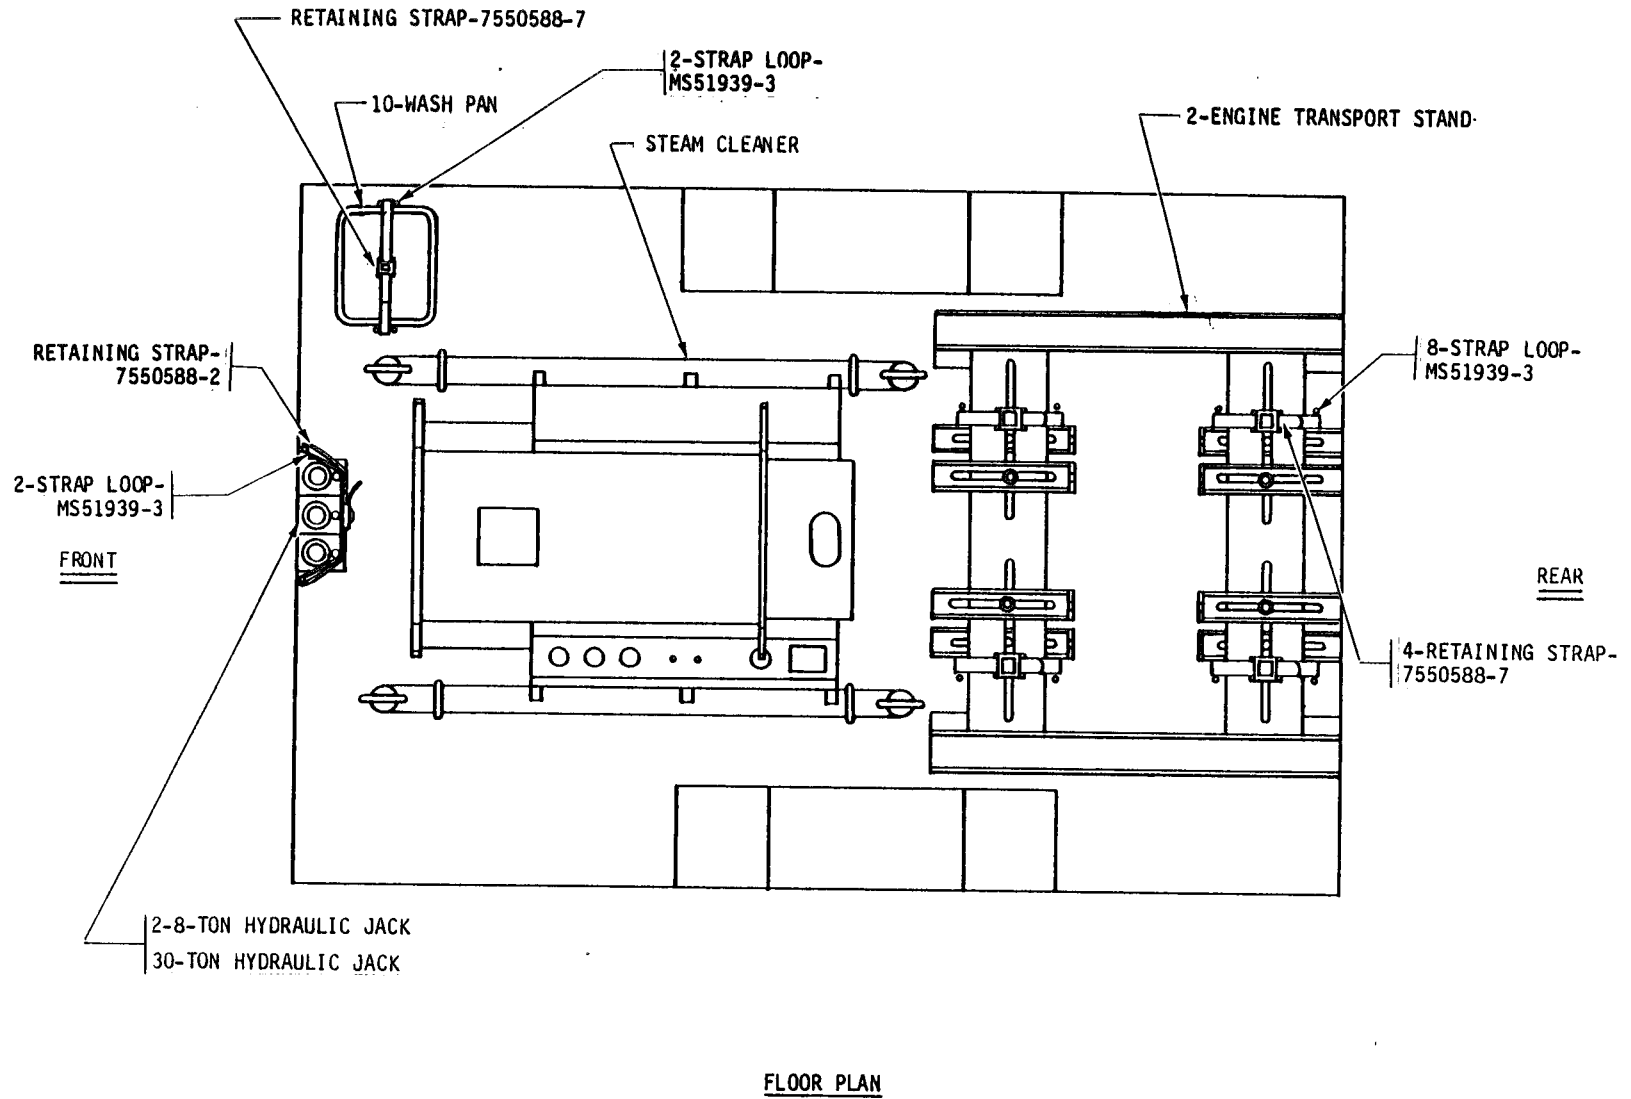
Components to be mounted, floor plan, unit 4, M105A2.
